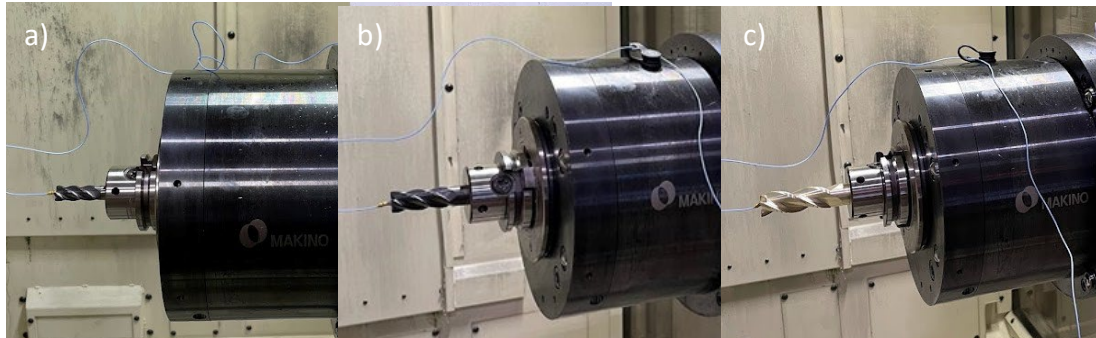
The tool tip receptance of a) 12.7 mm, b) 15.875 mm, and c) 19.05 mm diameter endmills were measured by impact testing.
